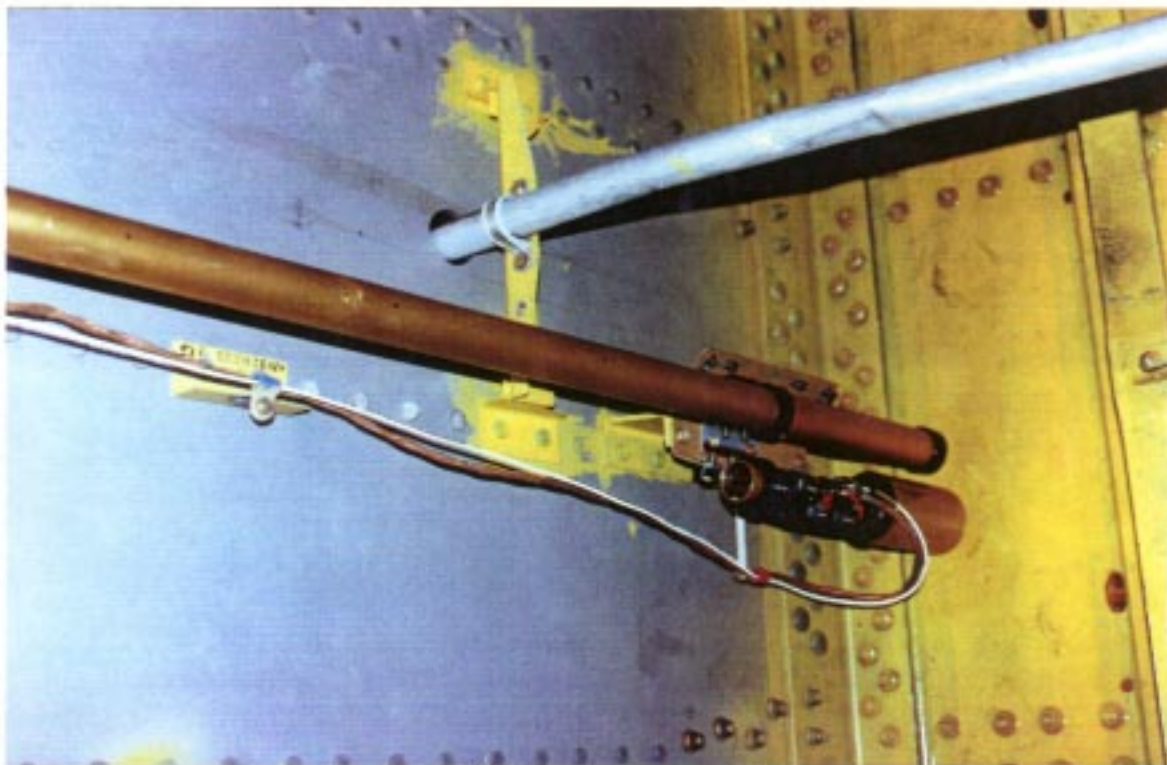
CWT Fuel probe mounted fwd of mid-spar with compensator and scavenge pump tube. Dents in probe and tube are visible
